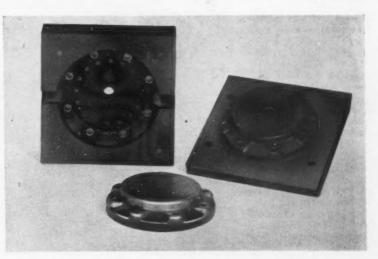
This 2-piece Plastics Jig is Used for Drilling a Number of Holes in the Aluminium Cover Seen in the Foreground. The Latter was Used as a Mould to Produce the Two Jig Members
